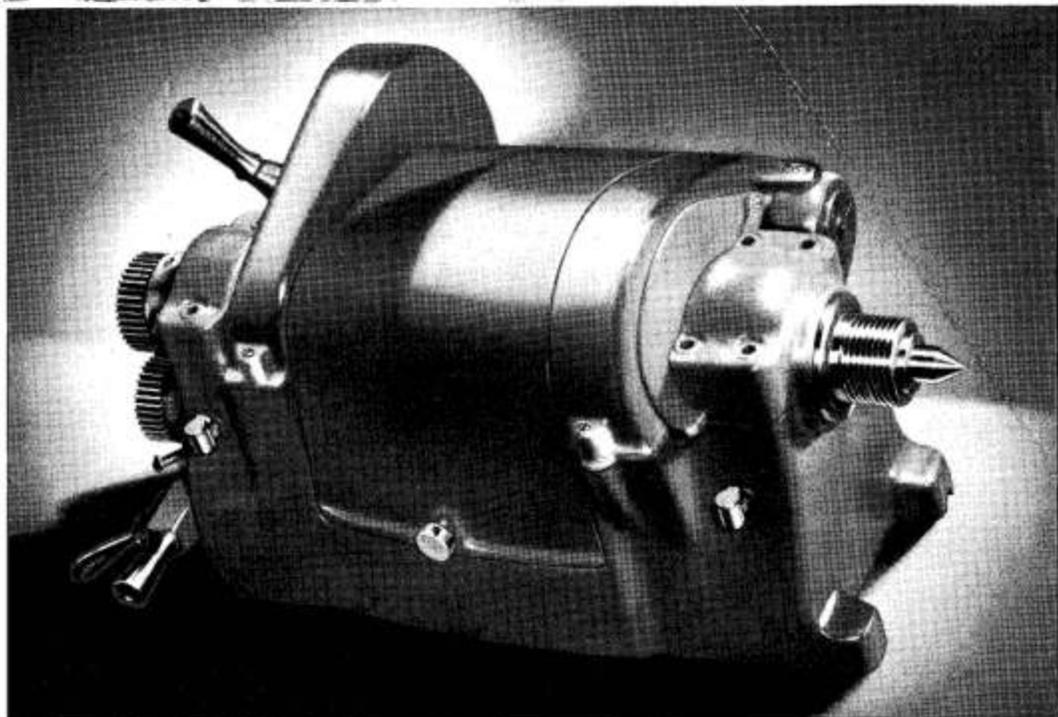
Headstock used on Underneath Motor Drive Lathes, 10-inch and Larger
